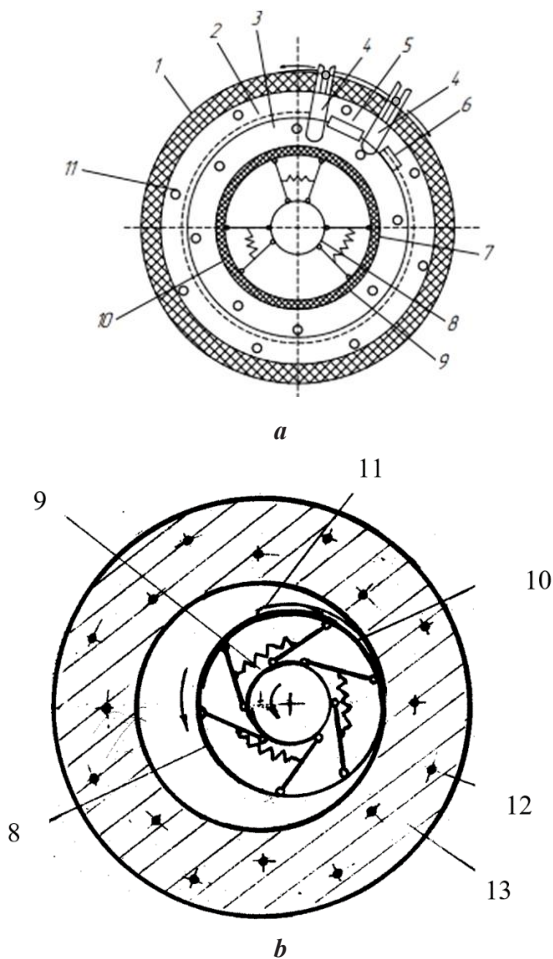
Diagram of the Manufacturing Process for a Ring-Section Element:
